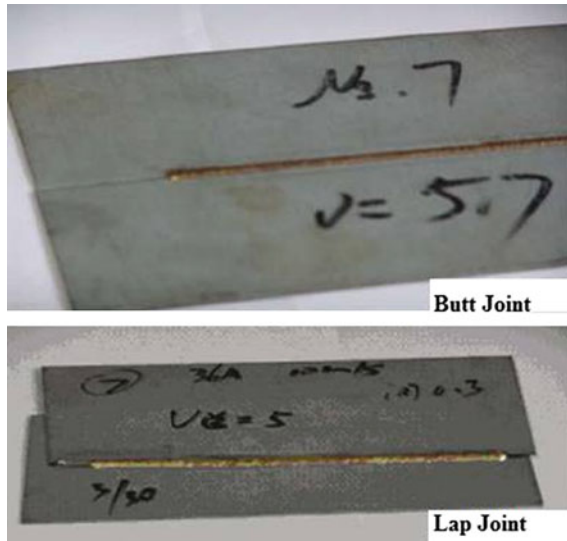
Laser brazed Zn-coated steel sheets in butt and lap configurations [50]
